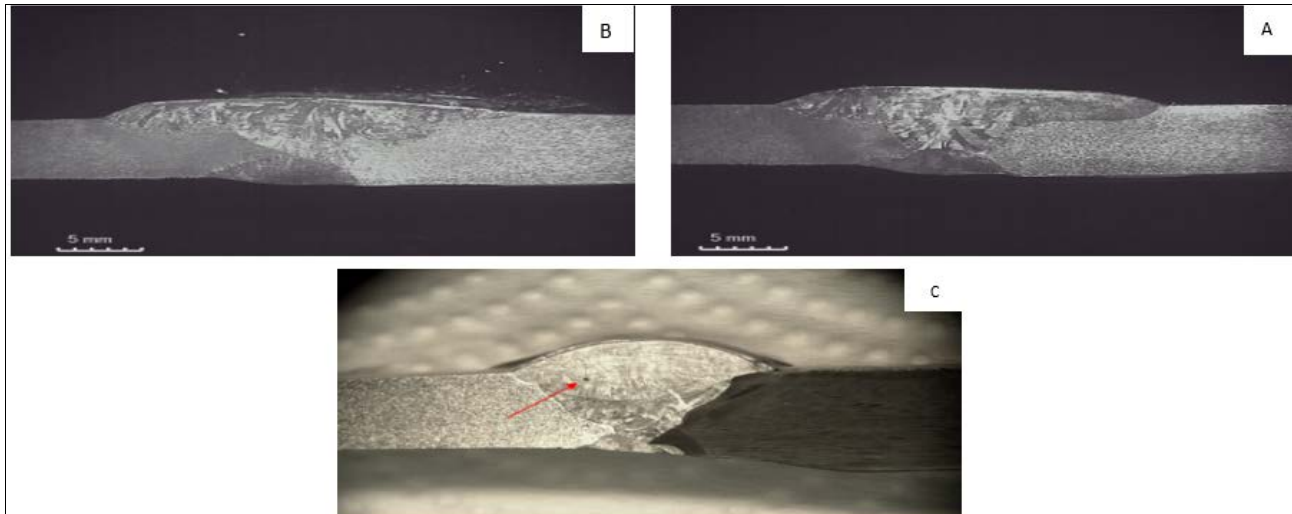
Macroscopic Examination of Welded Joints (Macroscopic images of the welded joints reveal uniform fusion and penetration in sections (A) and (B), demonstrating the integrity of the weld. In (C), a minor porosity defect is observed (indicated by the red arrow), highlighting a small imperfection within the weld structure).
